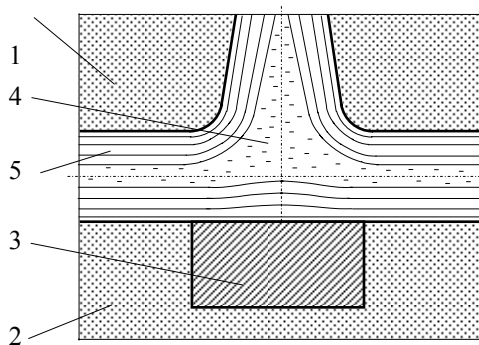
Solidification with cooling element: 1-casting mould, 2-mould kernel, 3-cooling element, 4-liquid phase, 5-solid phase.
